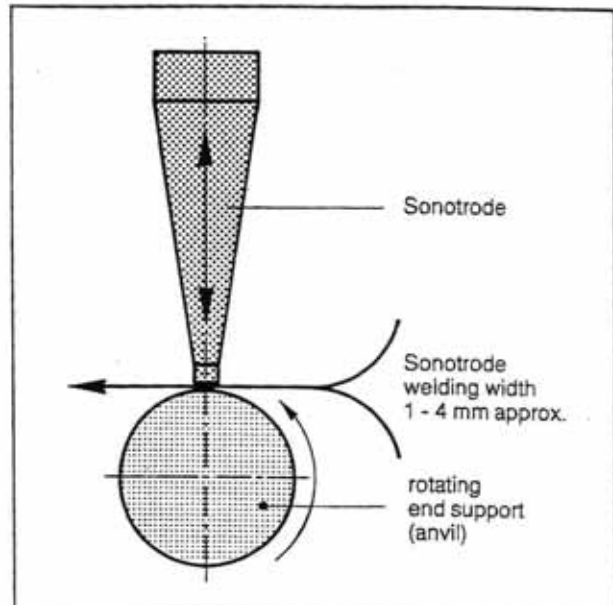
Ultrasonic seam welding, continuously powered by the rotating end support.
